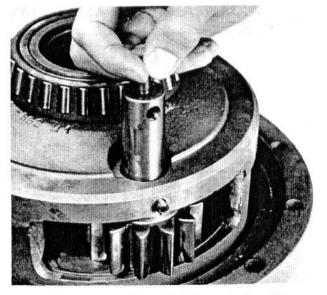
Planetary Pinion Shaft Removal or Installation
